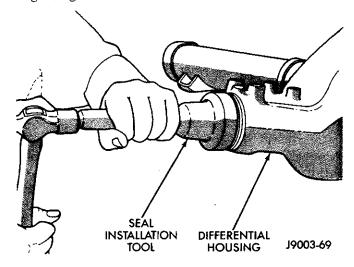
Drive Pinion Gear Shaft Seal Installation
